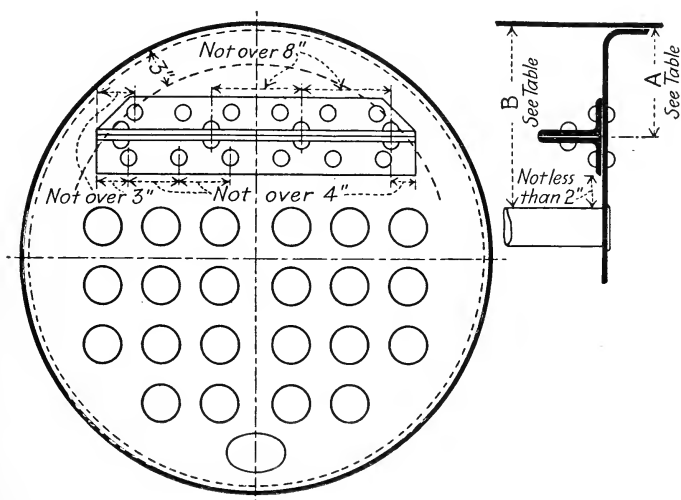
STAYING OF HEAD WITH STEEL ANGLES IN TUBULAR BOILER
